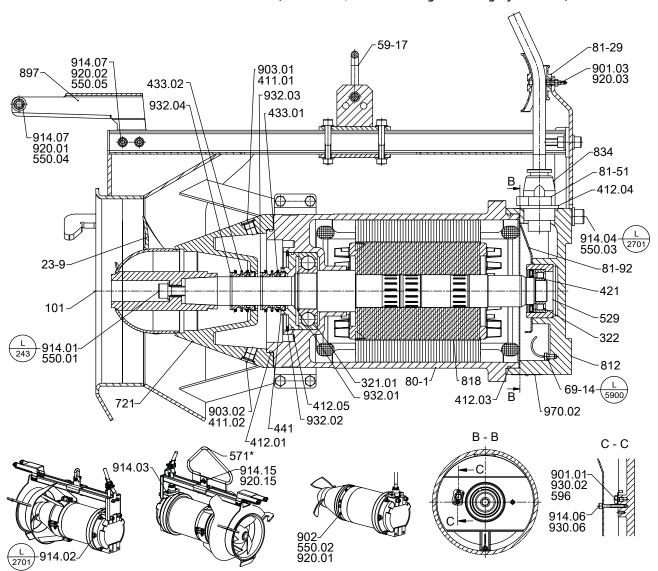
General assembly drawing: a) with shackle b) with bail (optional)
